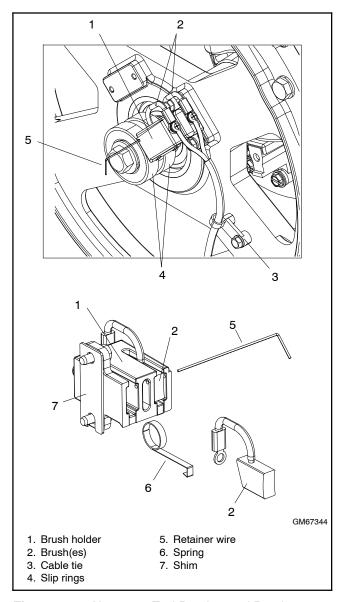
Alternator End Bracket and Brush Assembly (original)
